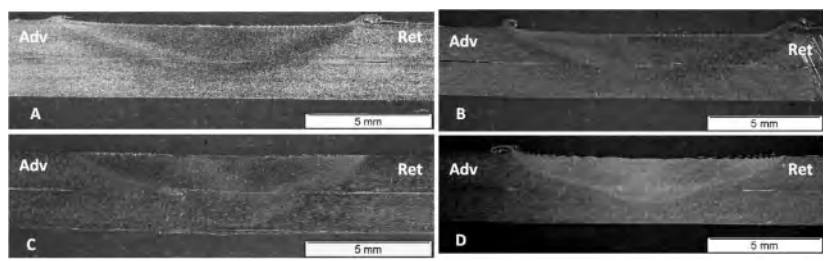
Cross-sections of FSW lap joints performed with (A) a non-threaded - 1,5 mm long probe tool at 1500 rpm – 150 mm/min; (B) a threaded - 1,5 mm long probe tool at 1500 rpm – 150 mm/min; (C) a non-threaded - 2 mm long probe tool at 750 rpm – 300 mm/min; and (D) a threaded - 2 mm long probe tool at 750 rpm – 300 mm/min.
